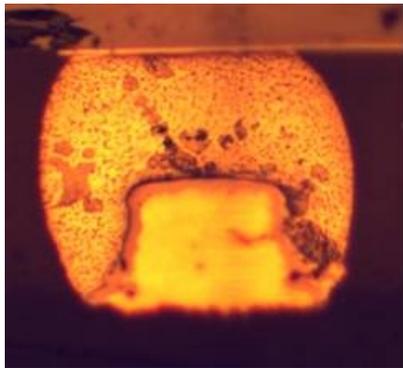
Good Soldering of an Undamaged Tin-Lead Bump With 1.0 mil Thick Flux
